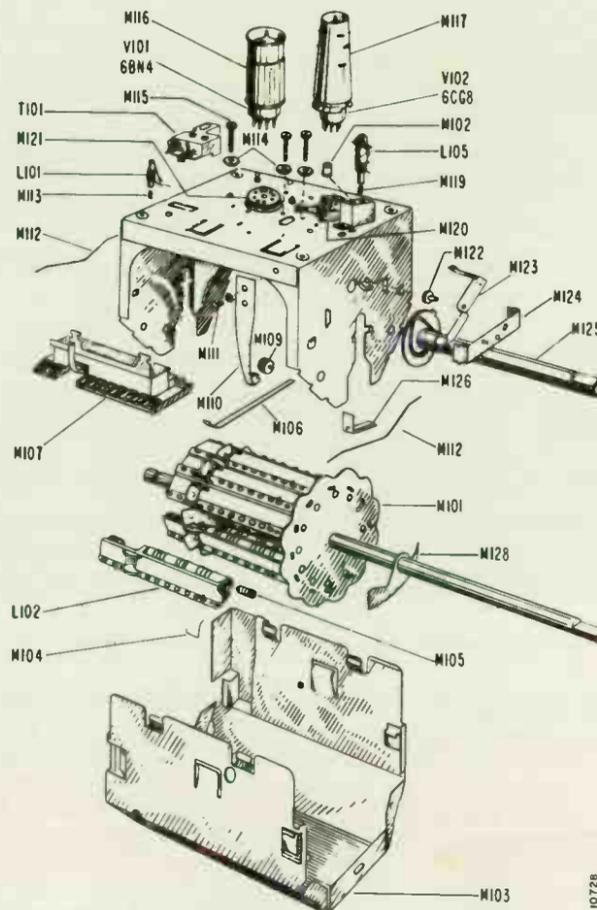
Exploded View of VHF Tuners 94D151-1 and 94D151-2.
